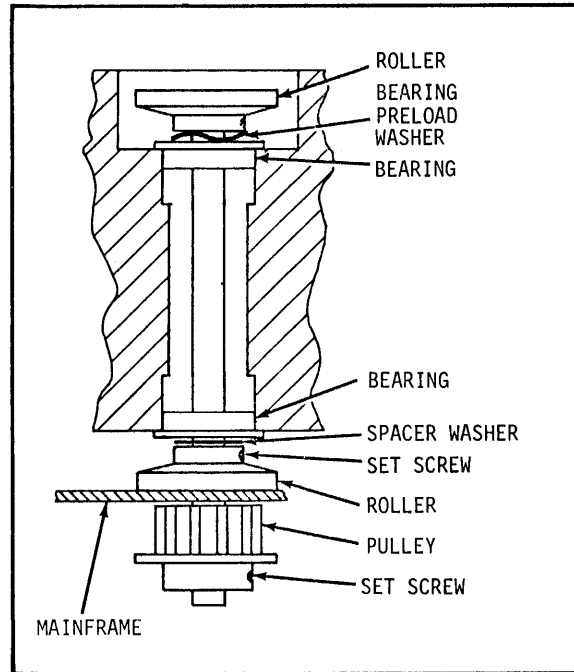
Roller Shaft Bearing Preload Adjustment
